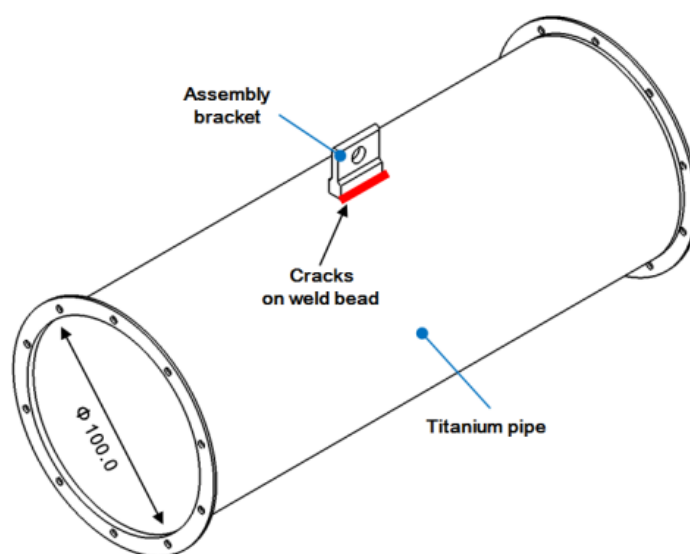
Illustration of cracks occurred Ti-3Al-2.5V pipe weldment.
